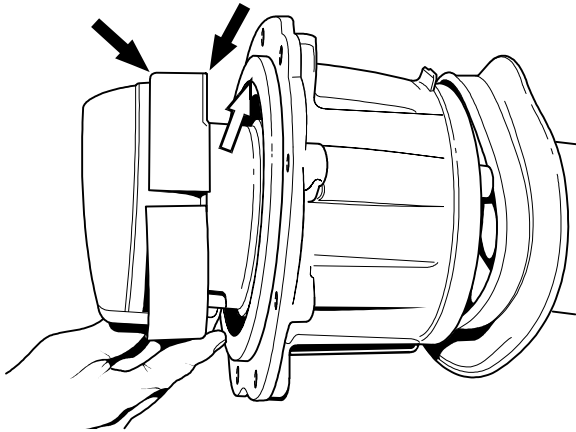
Torque Ball Housing and Torque Ball Shell Halves
